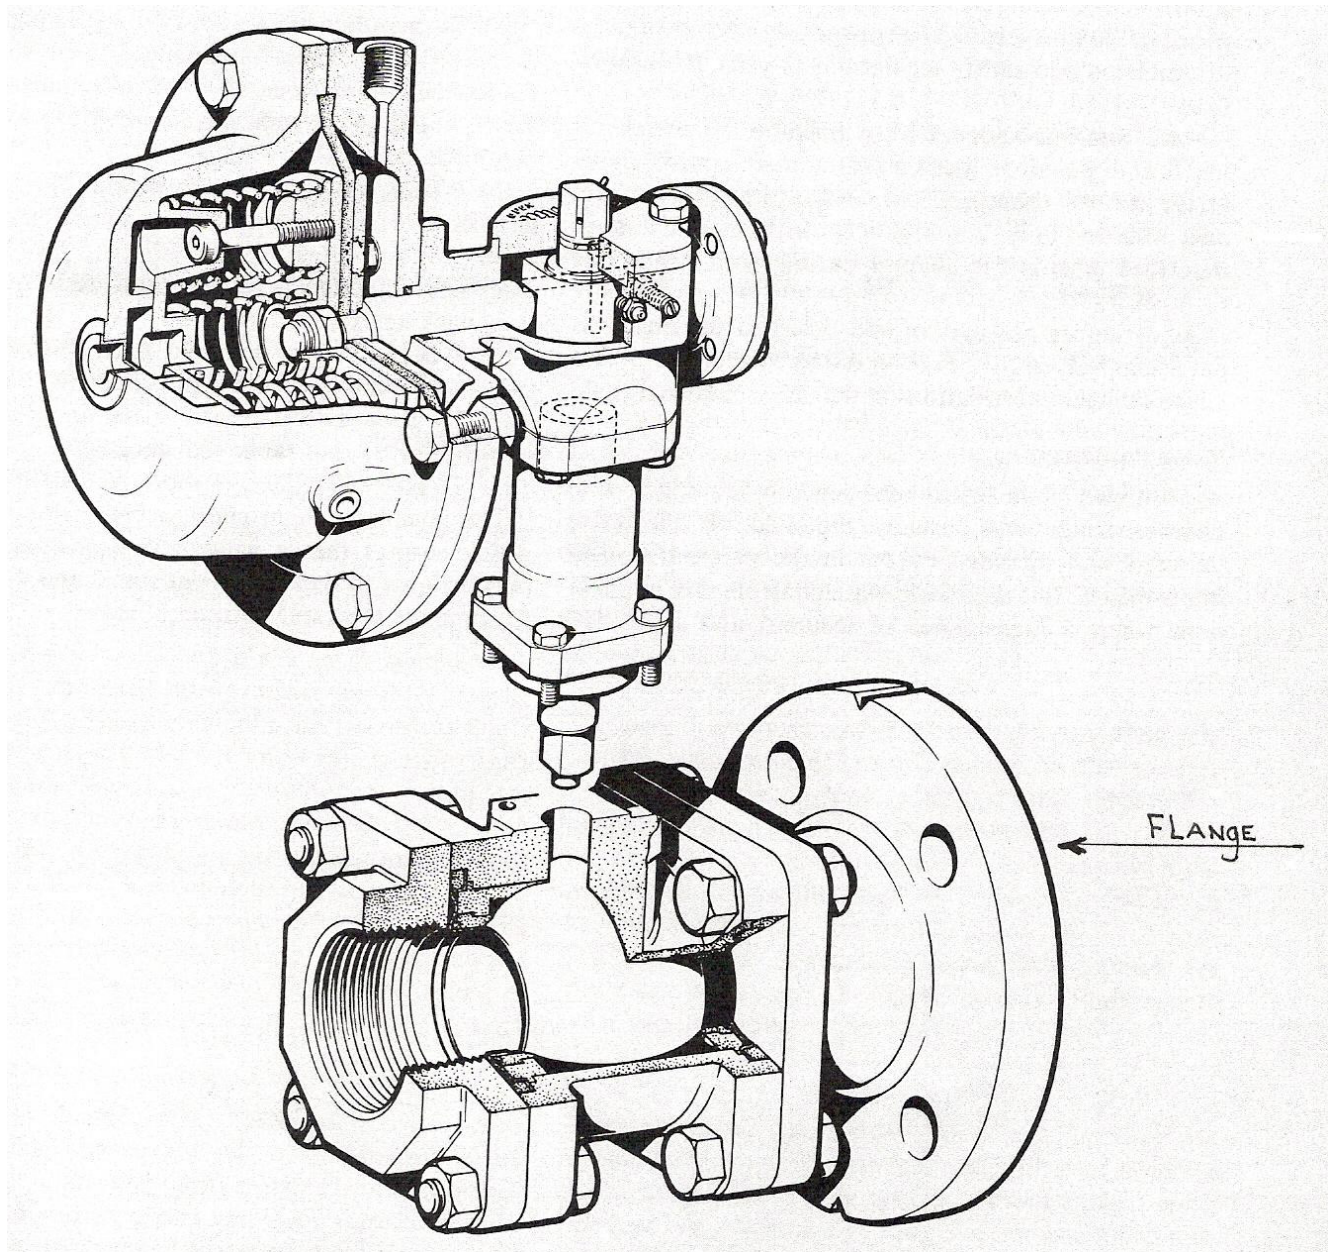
Diaphragm Operated Actuator mounted on Ball Valve
